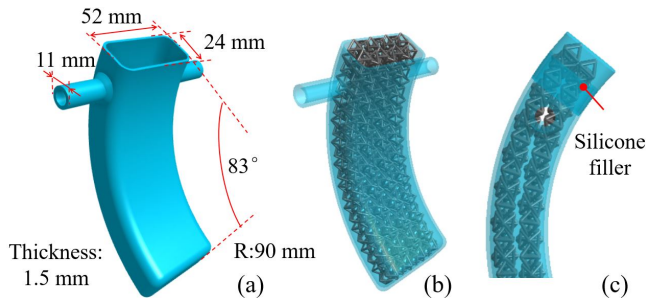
(a) Dimensions of the finger chamber. (b) Finger chamber with inserted two-layer chain mails. (c) The silicon filler embedded the root of chain mail into the finger chamber.
